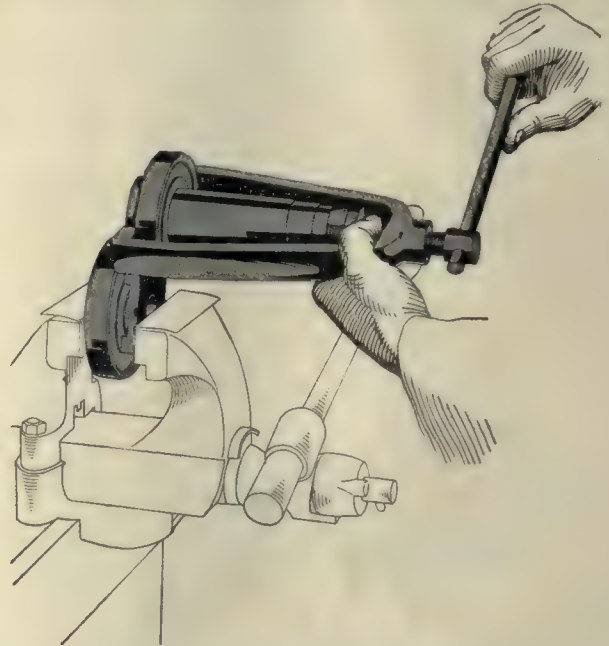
REMOVING BALL RACE FROM SHORT-END CRANKSHAFT
